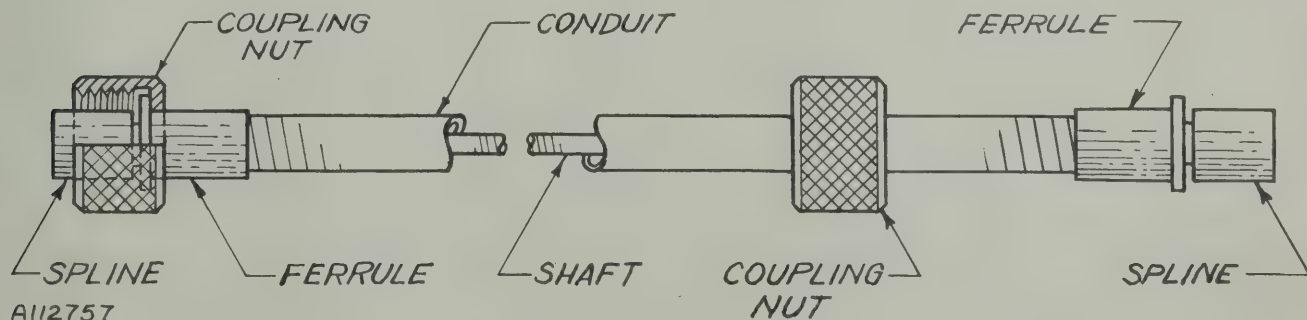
MECHANICAL CABLE CONSTRUCTION
